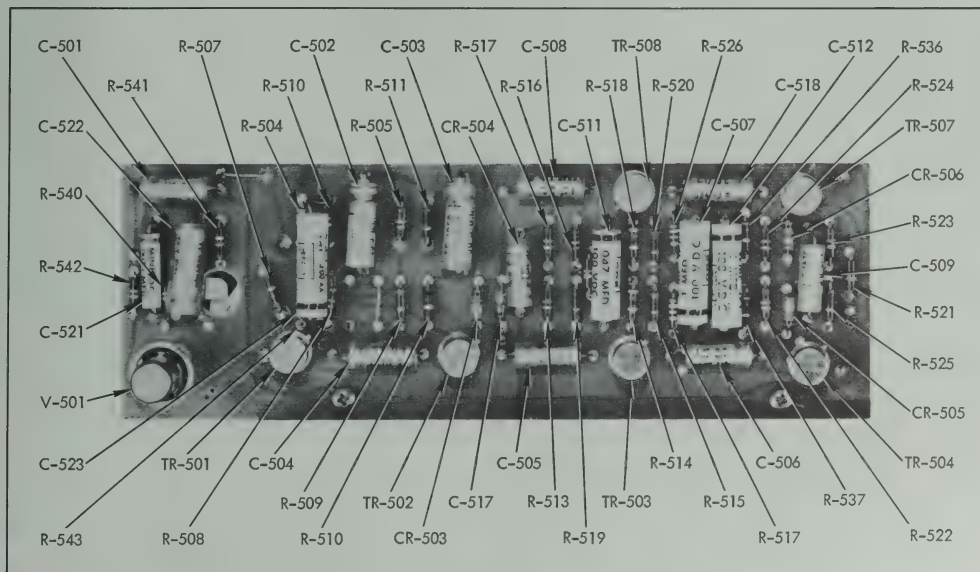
X-AXIS PRINTED CIRCUIT BOARD
